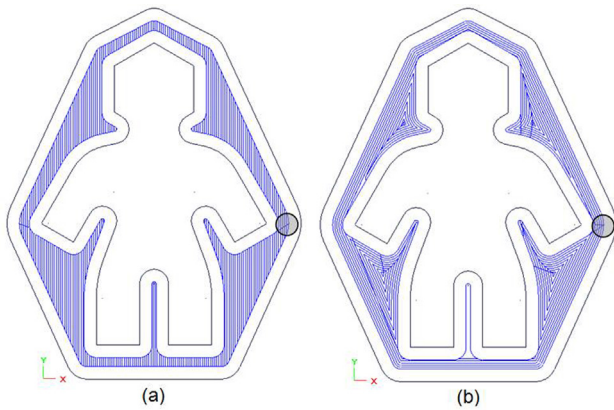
(a) Zig-zag and (b) contour-parallel tool paths.
